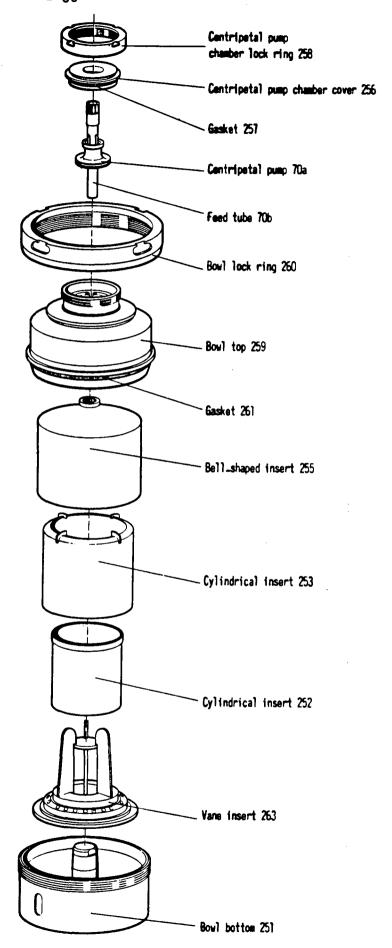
A Four chamber bowl assembly for Westfalia clarifier
